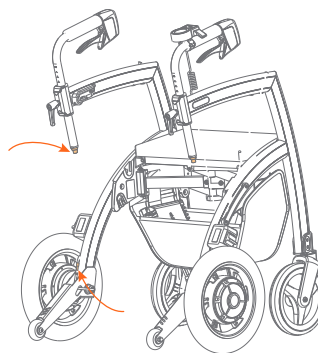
Brake adjustment via the adjustment screws at the top and bottom of the brake cable.
